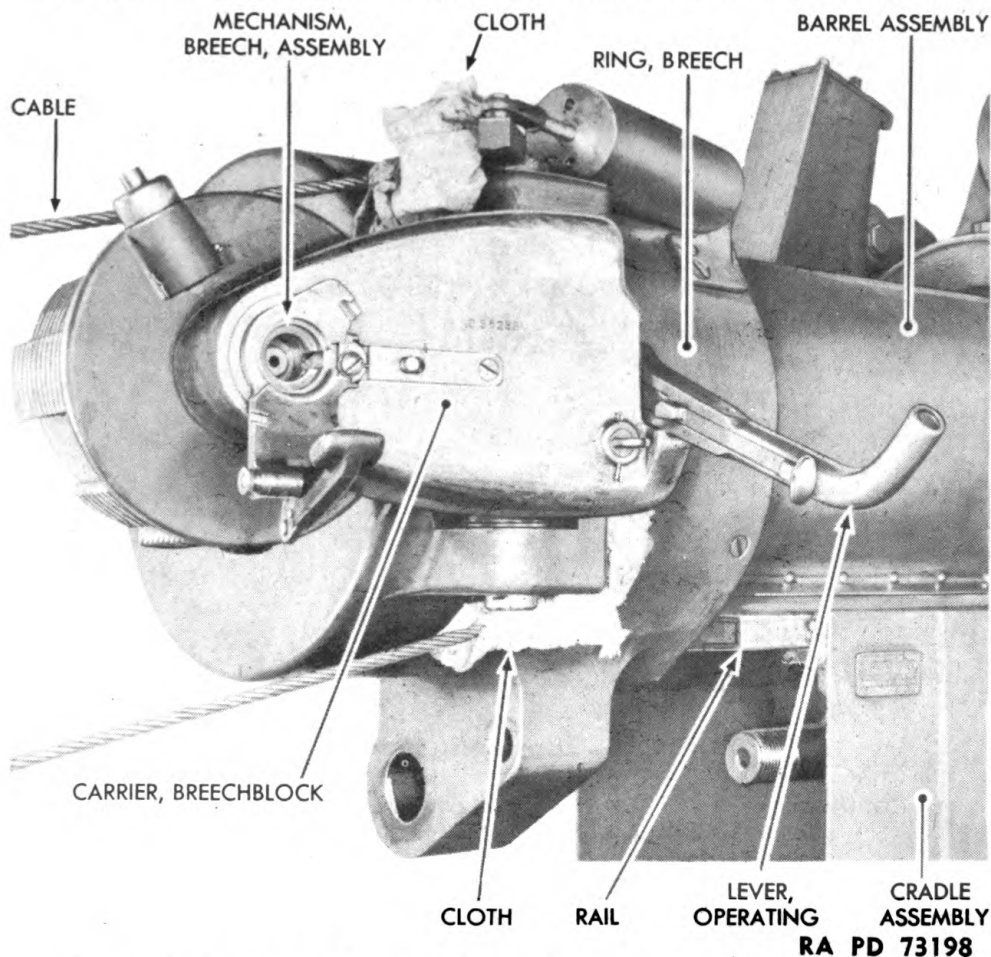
Removing Howitzer Barrel Assembly (Step A)
